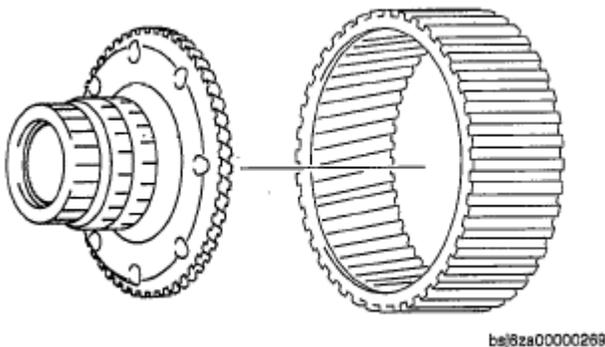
Identifying Rear Planetary Ring Gear Flange
